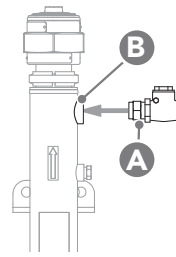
Modular CLV check valve and nipple assembly (A) and coolant tank outlet (B).
